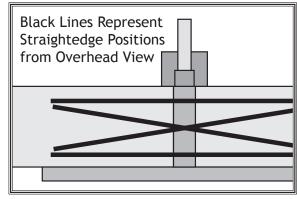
Straightedge positions for checking infeed/outfeed table parallelism.
